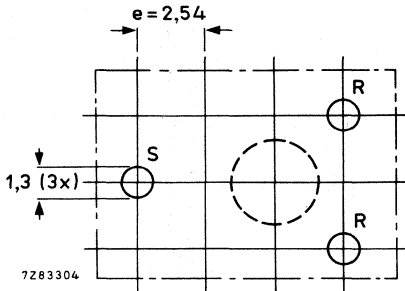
Large hole is necessary only if bottom adjustment is to be used
